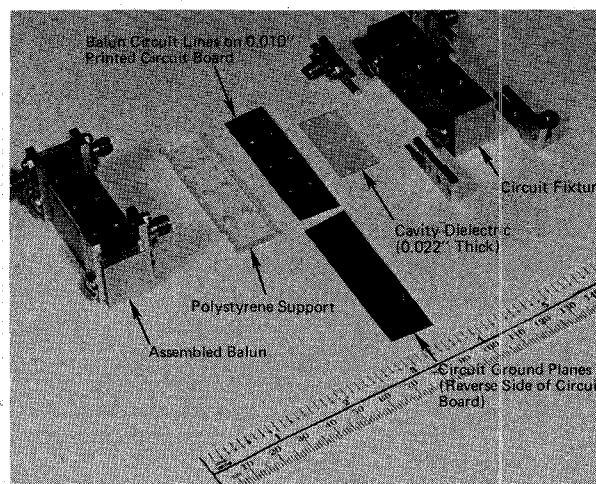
Photograph of assembled balun and exploded view of balun circuitry.
